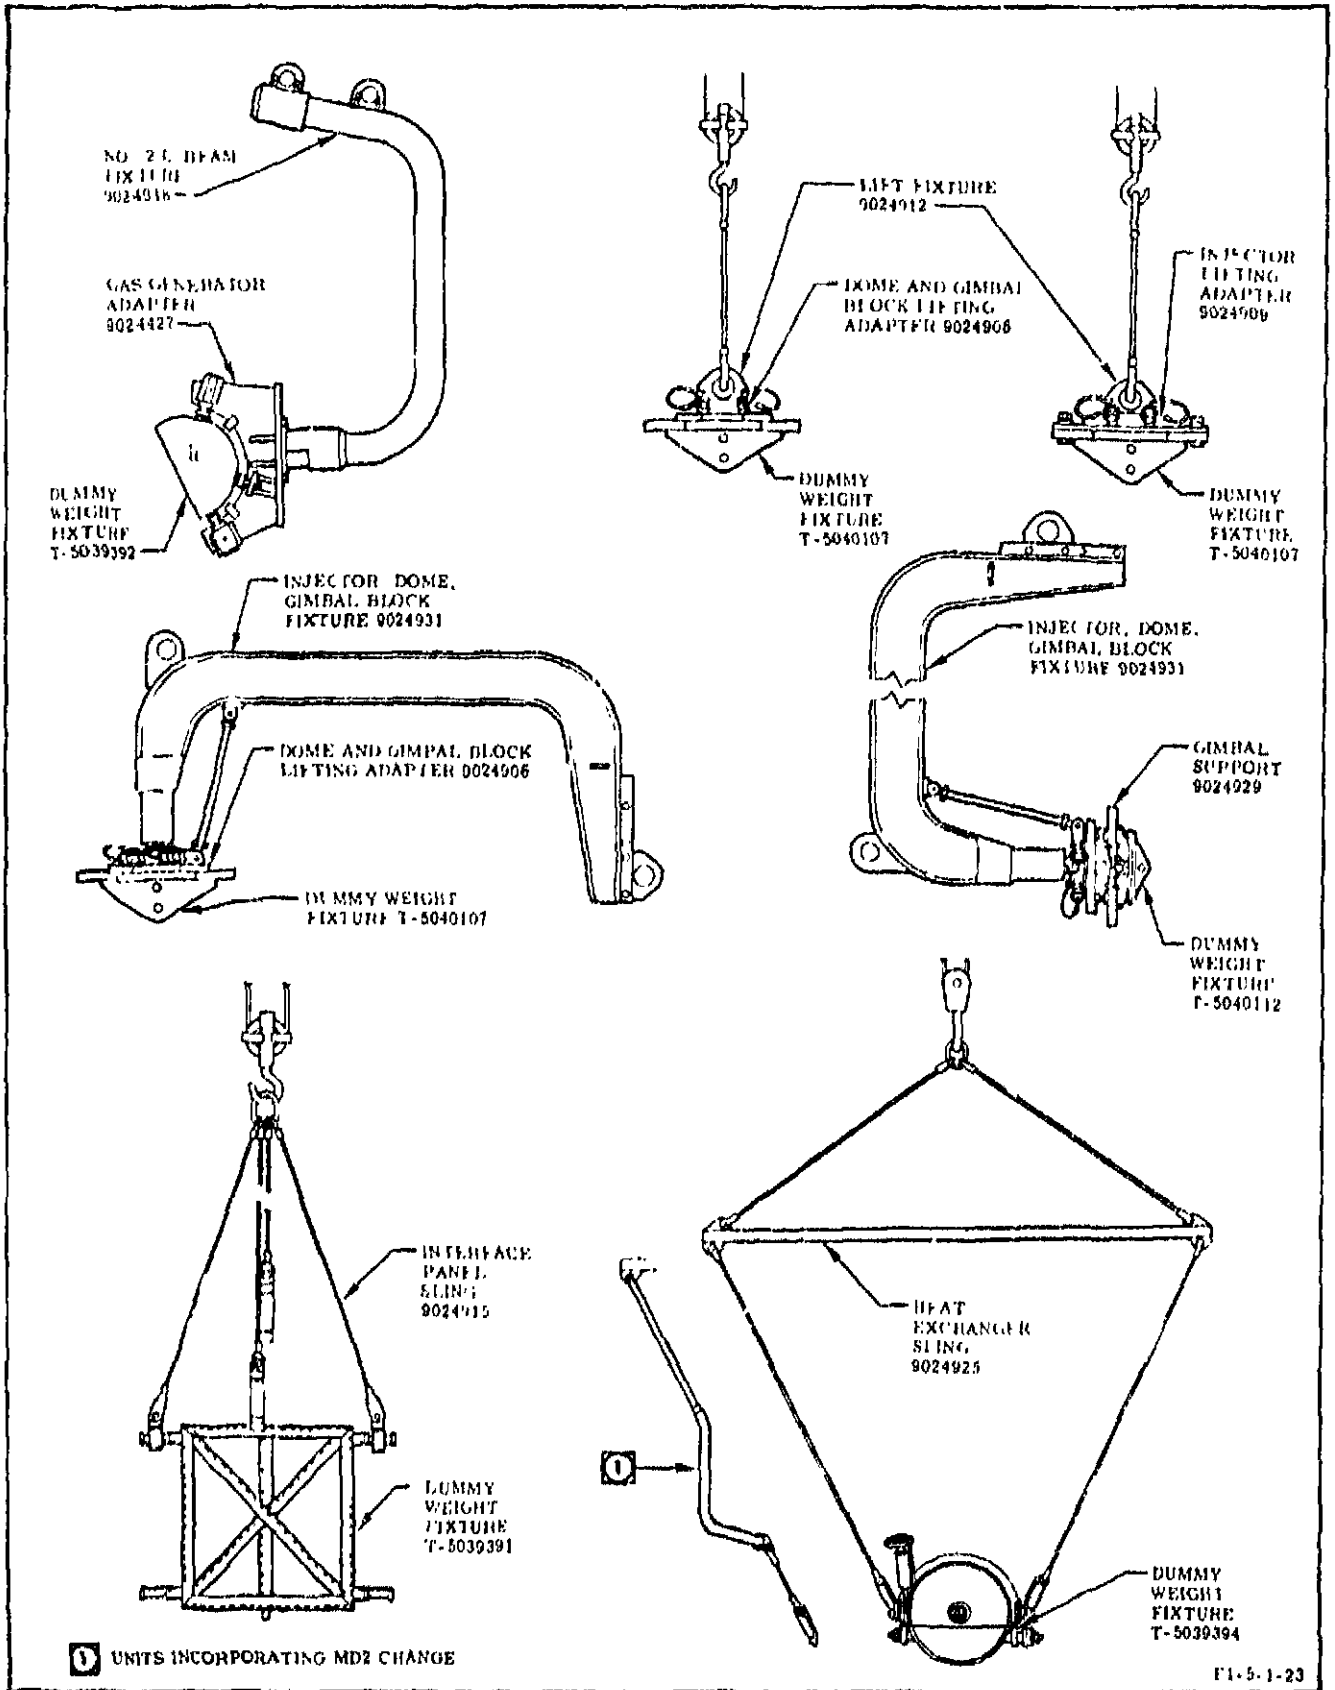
Recommended Proof-Test Setup for Component Handling Fixture Set (Sheet 1 of 4)
